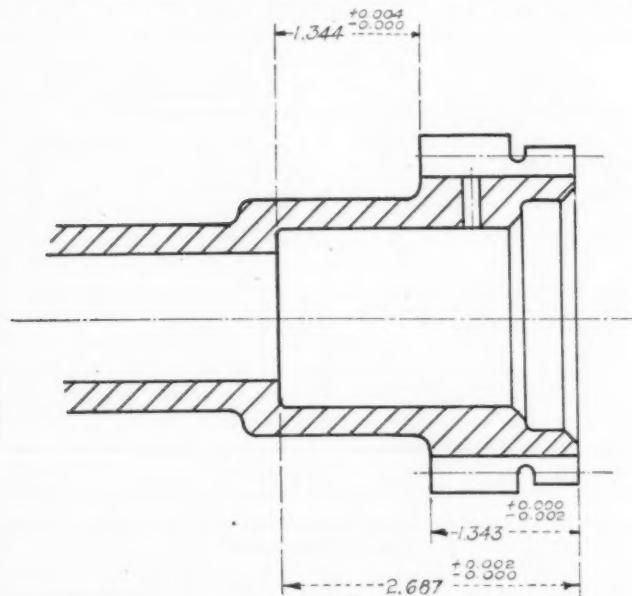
TOLERANCES ON AN AUTOMOBILE TRANSMISSION GEAR
